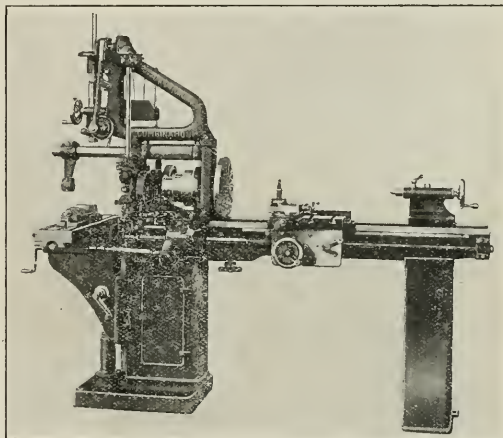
COMBINATION LATHE, MILLING AND DRILLING MACHINE
